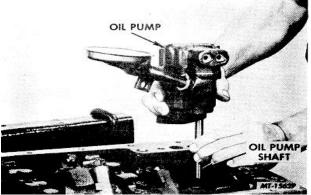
Checking Oil Pump to Cylinder Block Alignment
